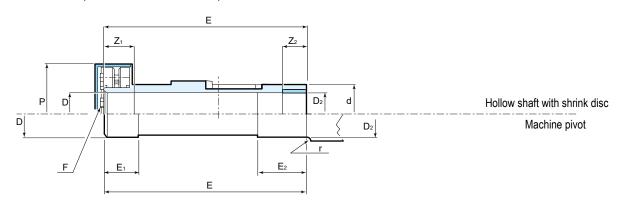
Hollow low speed shaft and machine pivot with shrink disc
